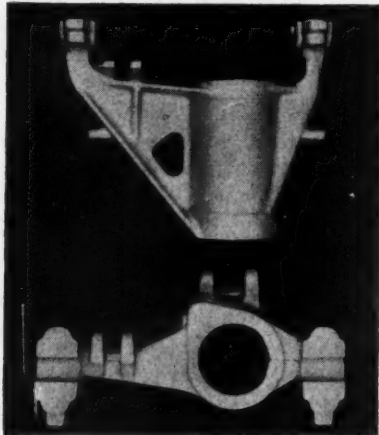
Left—Landing-gear shock strut for carrier fighter plane. Formerly a forging, part is now a heat-treated steel casting
